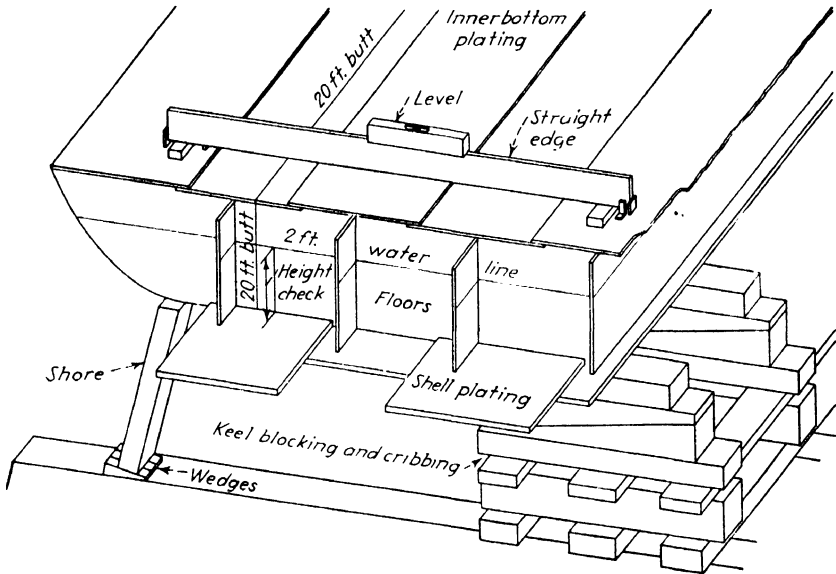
Subassembled section of inner bottom being leveled with a straightedge and spirit level.
